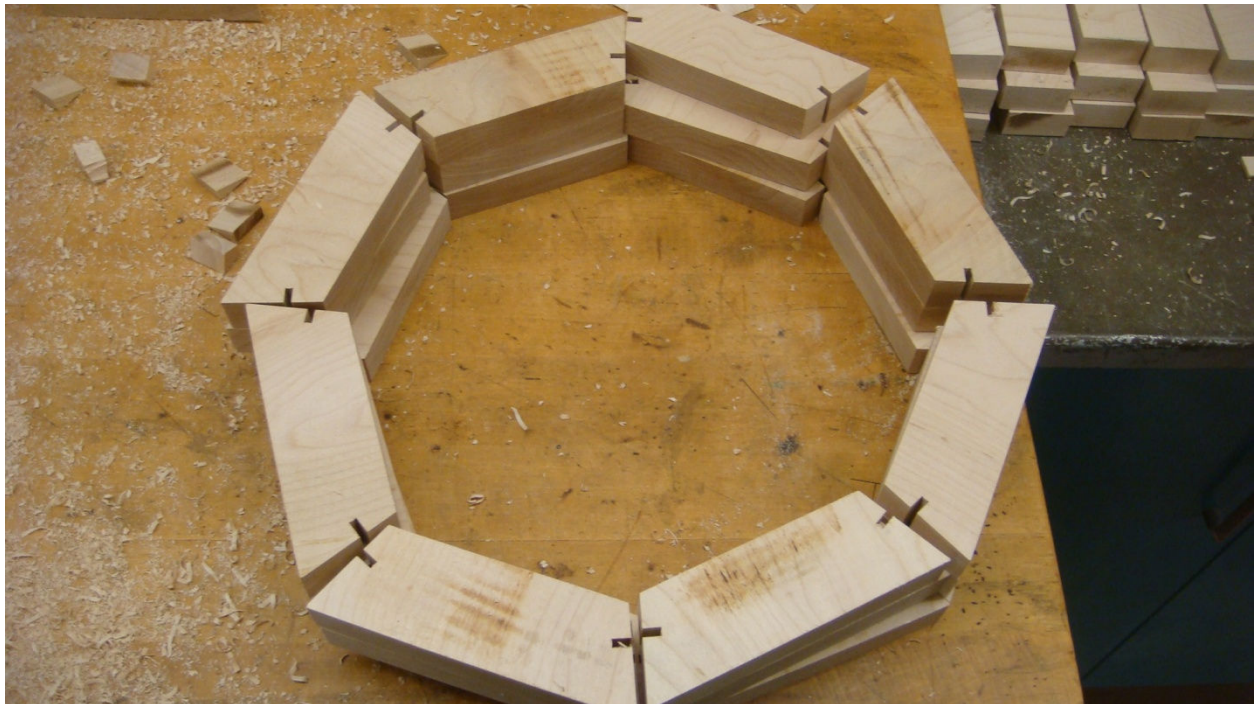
Block Rim Before Gluing. Blocks after they have been cut at 22.5 degrees on both sides prior to staggering the center row.
